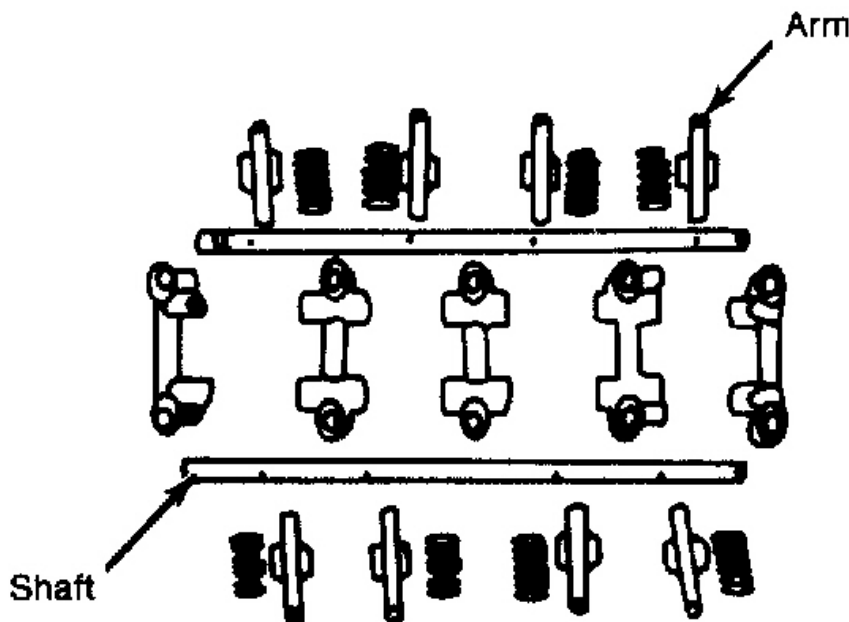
Disassembled View Of Rocker Arm AssemblyVALVE TIMING
